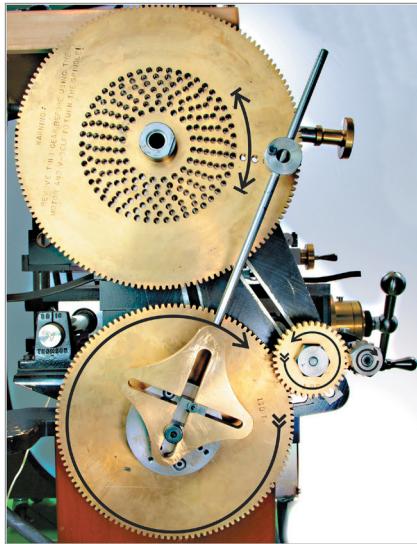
The reciprocating device on a Lawler lathe (photo courtesy Celia Kudro)
